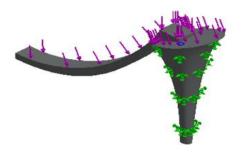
Loads and Fix Geometry of the Shank Piece and High heel
